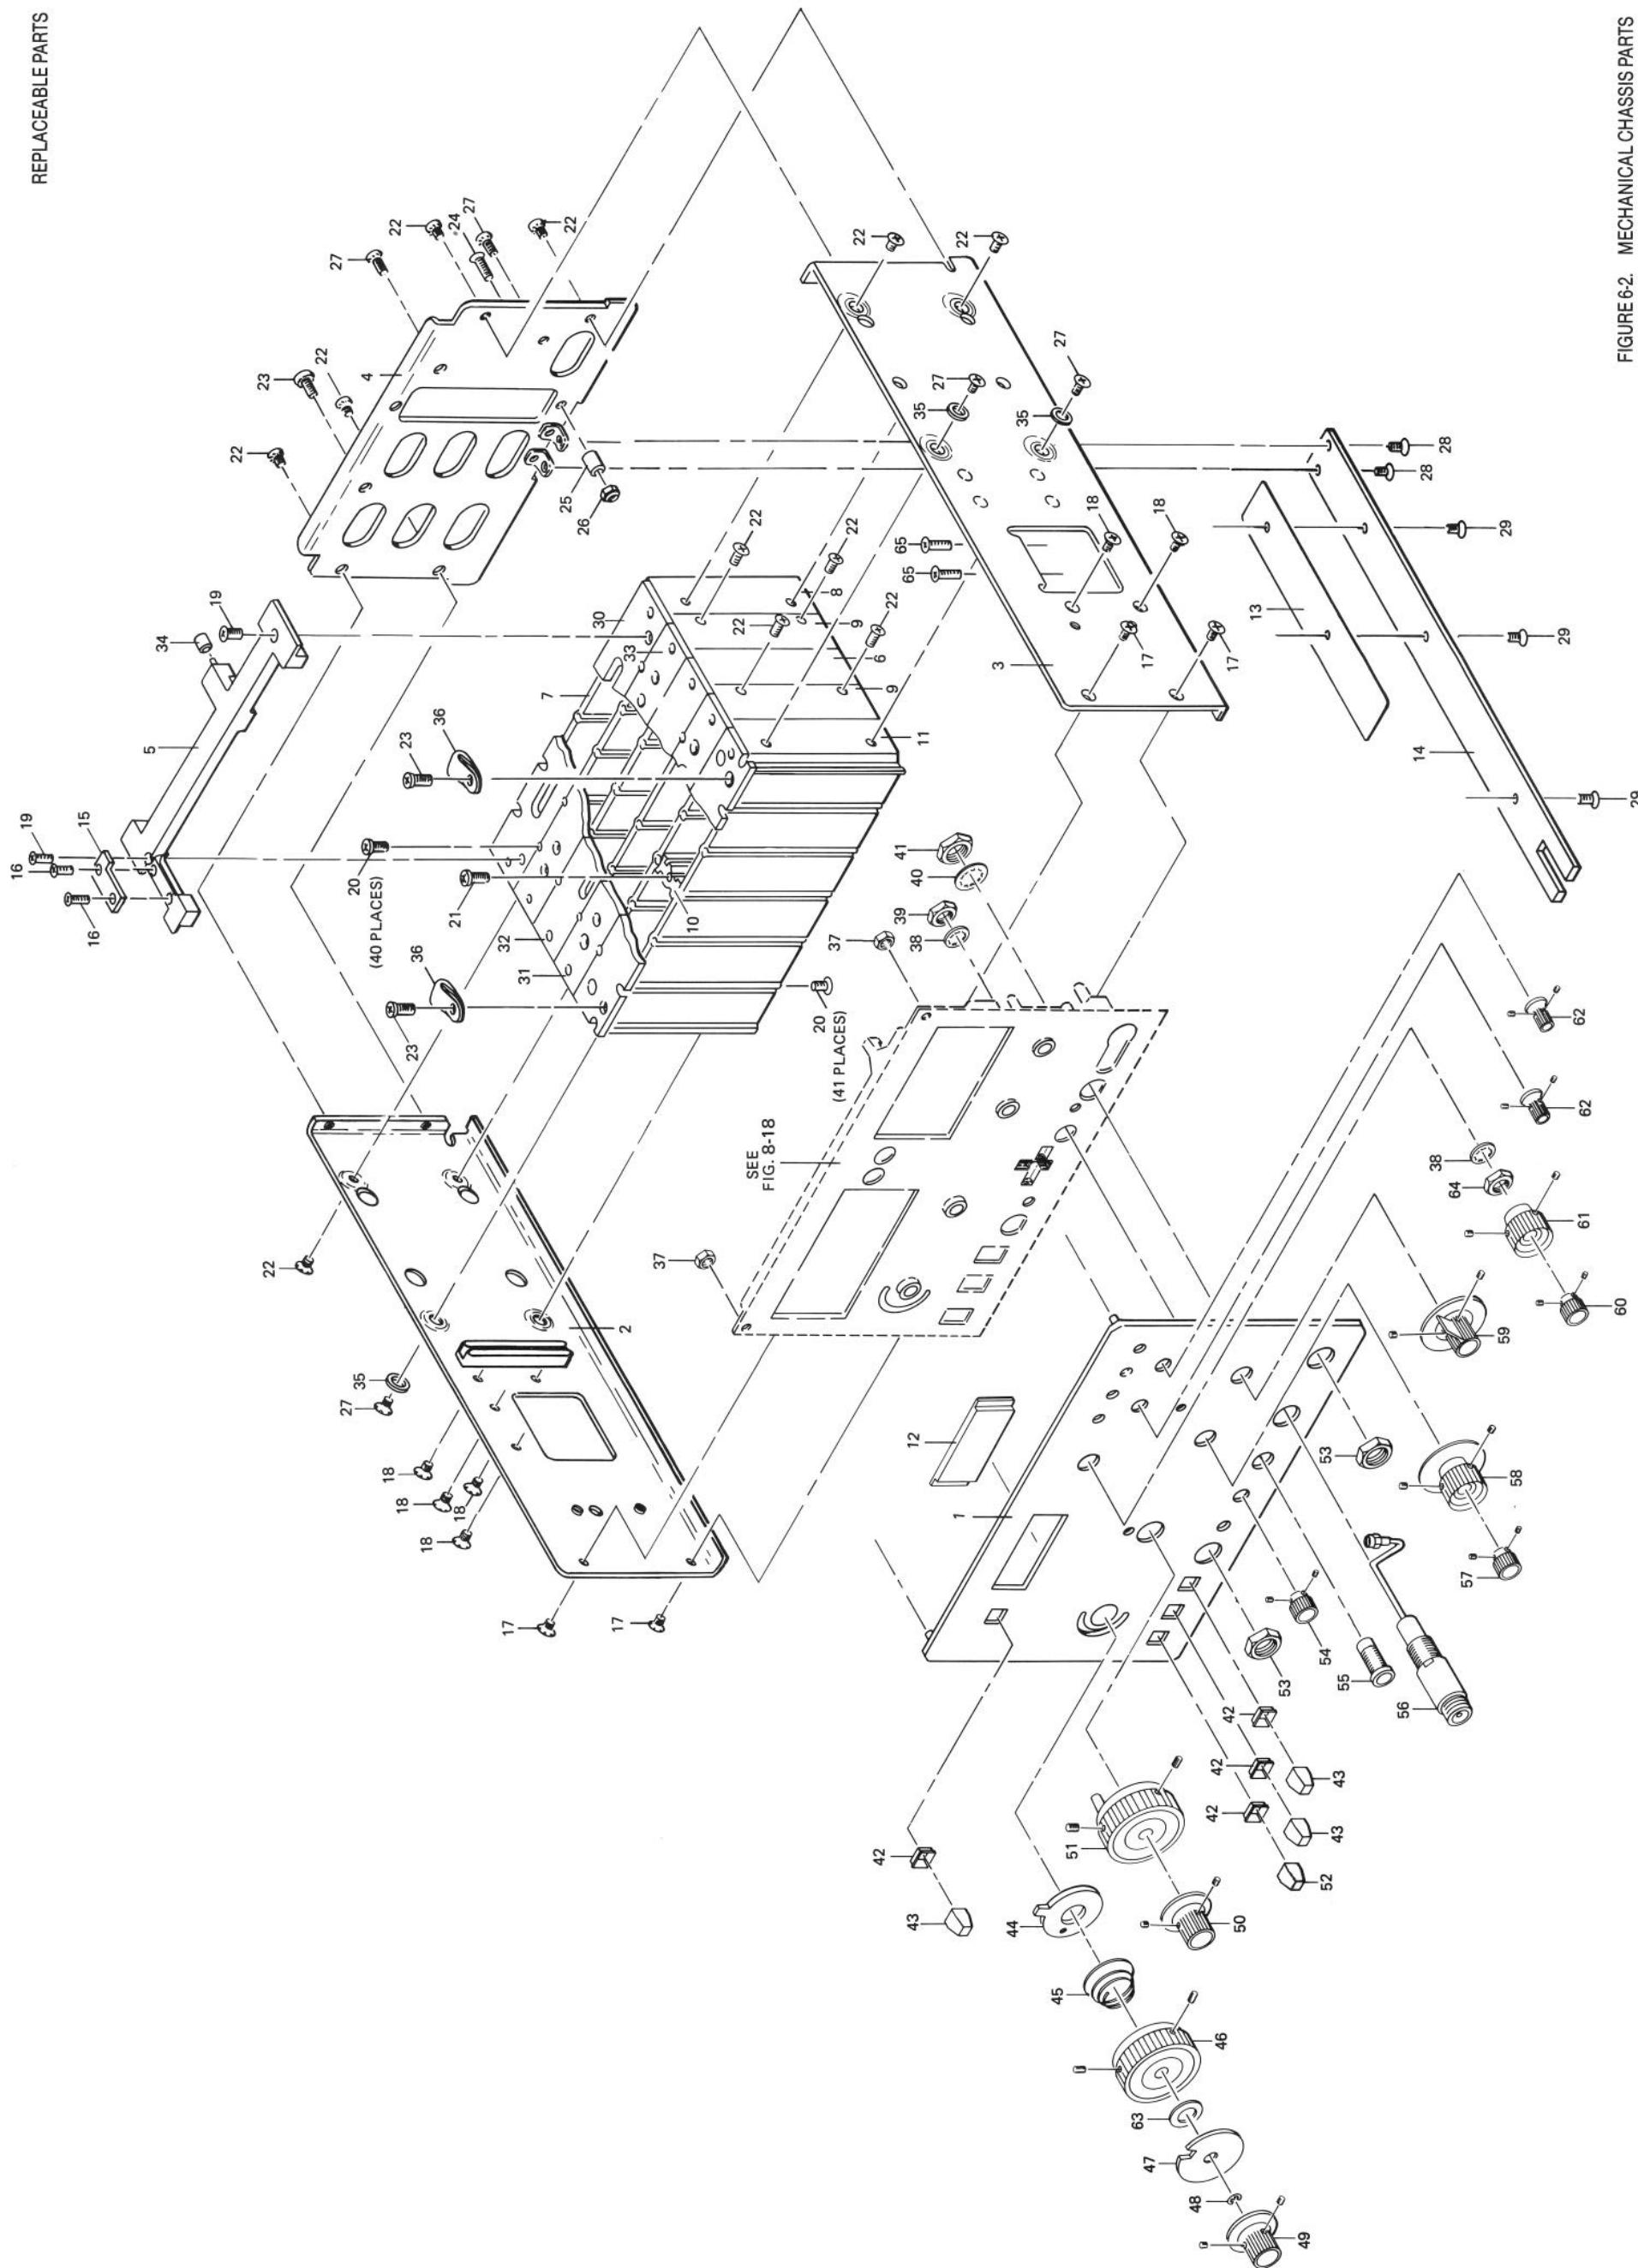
MECHANICAL CHASSIS PARTS
